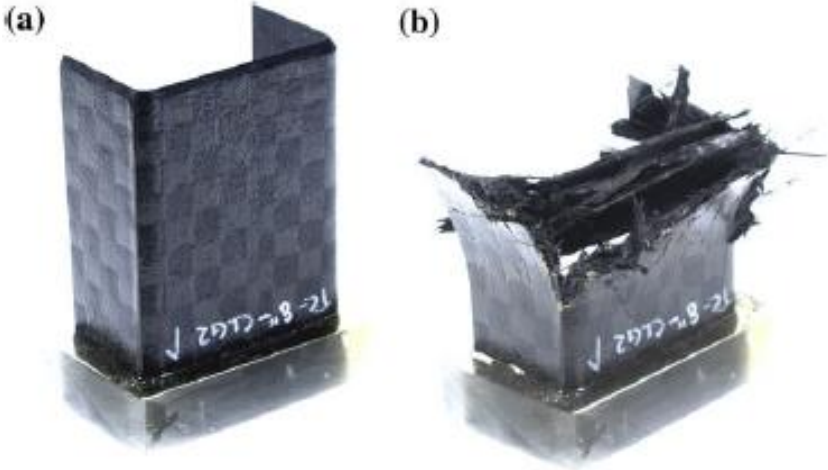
Large c-channel, specimen II, (a) before and (b) after crush testing.
